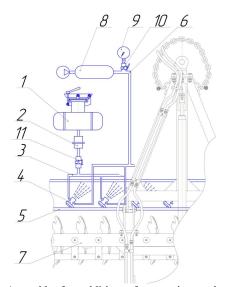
Assembly for addition of protecting and stimulating liquids into soil: 1 – reservoir; 2 – surge tank; 3 – feeding pipeline; 4 – pneumatic slot sprayer; 5 – apron; 6 – pneumatic pipeline; 7 – disk harrow; 8 – compressor; 9 – pressure meter; 10 – valve; 11 – shutoff device.
